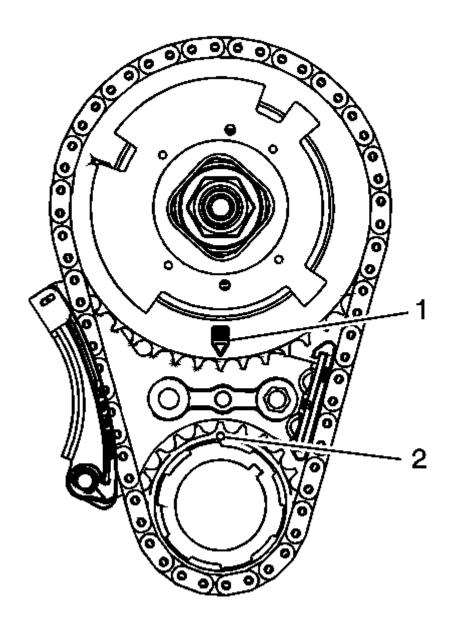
View Of CMP Actuator Alignment Mark & Crankshaft Sprocket Alignment Mark
